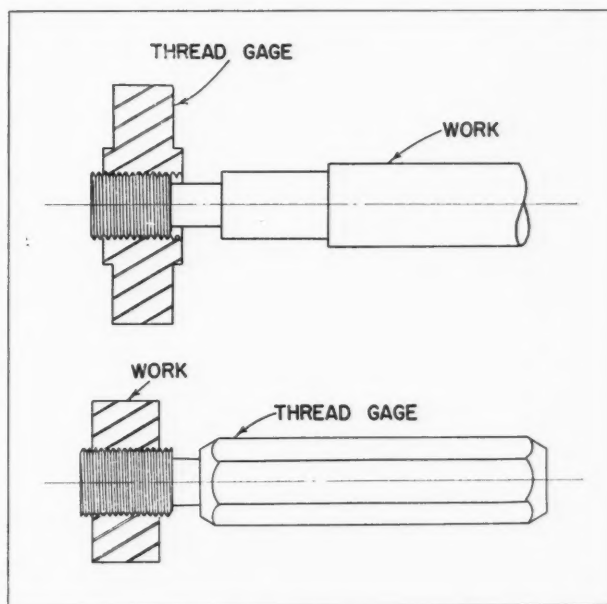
Methods of making functional checks on internally and externally threaded work-pieces
